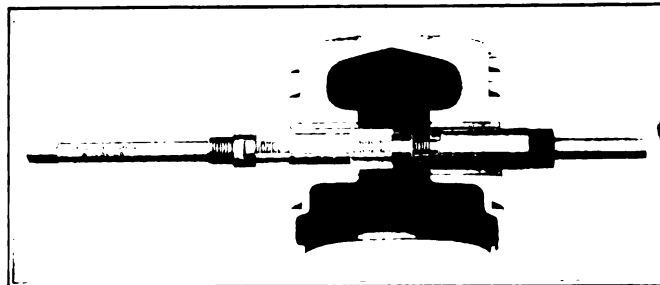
INTERNAL GRINDING FIXTURES FOR B. & S. NO. 4 MACHINE
